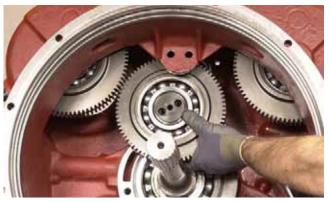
Remove pump drive idler gear, bearing, and support assembly.
